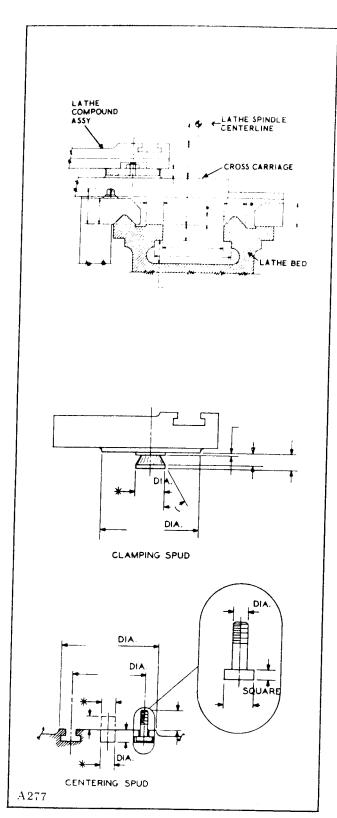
Dimensions to be Measured on a Lathe for Ordering a Factory Fitted Lathe Tracer Attachment, or for Installing a Standard Lathe Tracer Attachment
